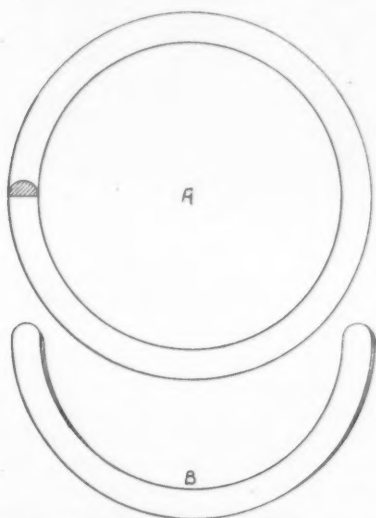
The Flat and Folded Appearance of a Connecting Link for the Weldless Joining of Two Pieces of Chain.
